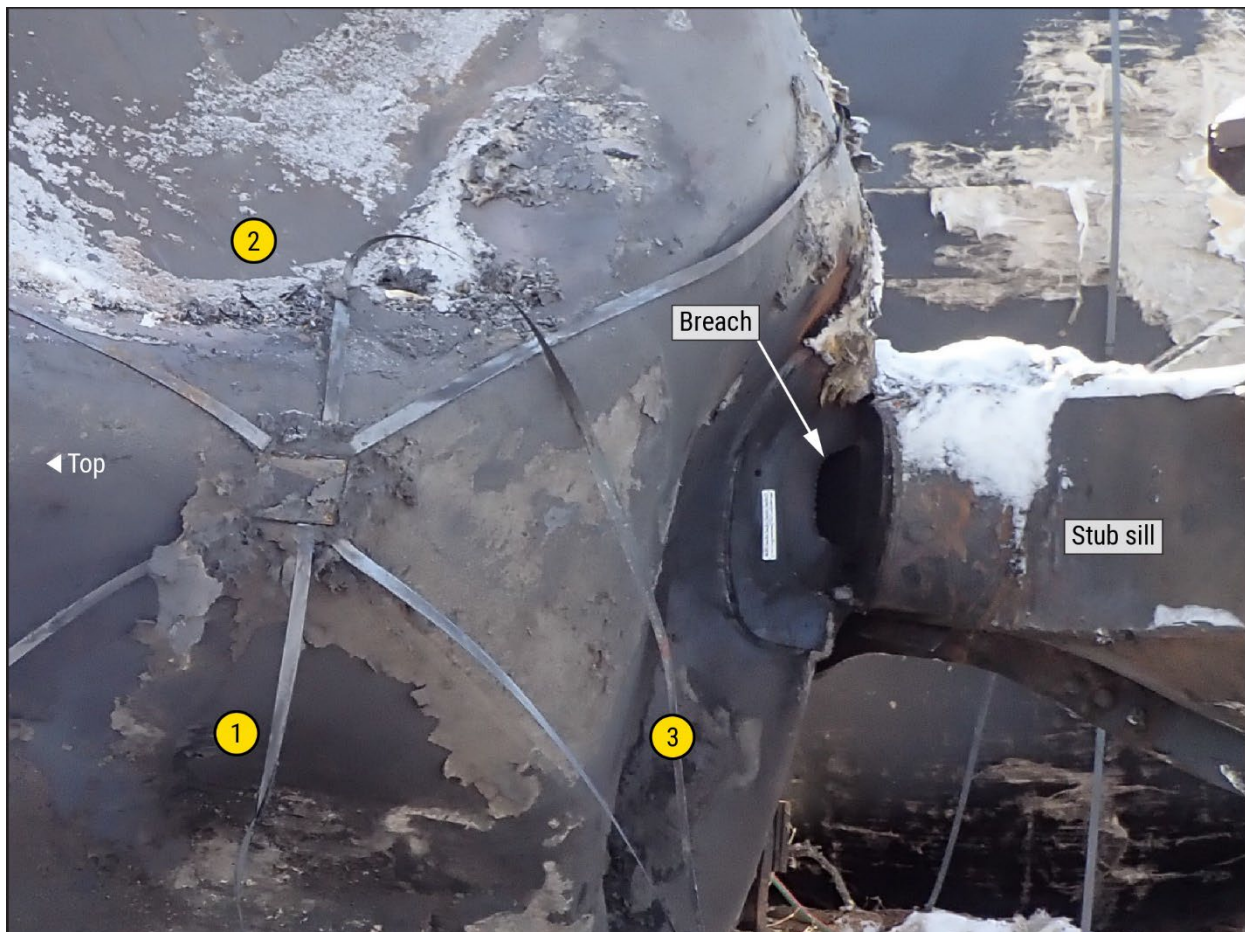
The A-end head of tank car TILX731751 postderailment and with the head shield removed for inspection, showing deformation from three impacts.
